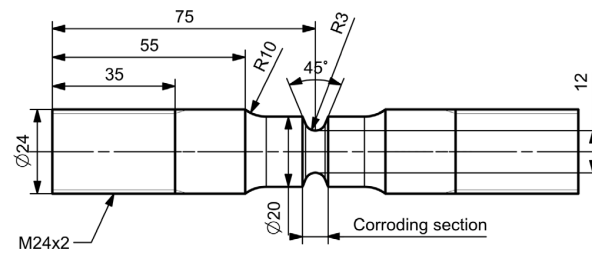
As-machined specimen geometry for TP1. All dimensions are given in millimeters.
